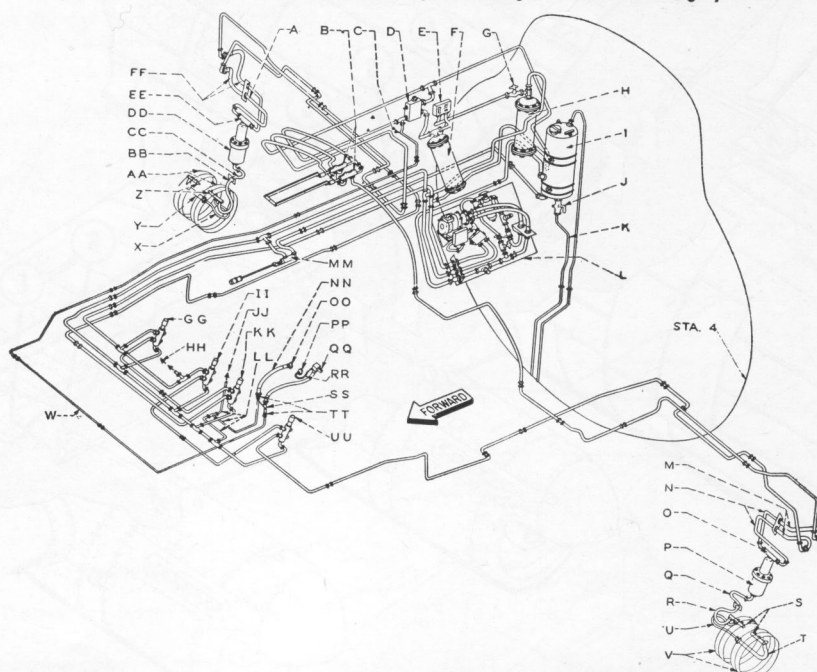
Hydraulic system installation: (A) copper tube $\frac{1}{2}$ in. OD \times .035; (B) emergency brake metering valves; (C) $\frac{3}{8}$ in. OD \times .035, 52SO; (D) relief valve; (E) selective check valve; (F) emergency accumulator; (G) manual shutoff valve; (H) accumulator; (I) supply tank; (J) drain cock; (K) $\frac{3}{8}$ in. OD \times .035, 52SO; (L) hydraulic panel; (M) hose assembly $\frac{1}{2}$ -in. tube; (N) copper tube $\frac{1}{2}$ in. OD \times .035; (O) shuttle valve; (P) return boost valve; (Q) copper tube $\frac{1}{2}$ in. OD \times .035; (R) hose assembly $\frac{1}{2}$ -in. tube; (S) inlet connection; (T) hose assembly $\frac{1}{2}$ -in. tube; (U) copper tube $\frac{1}{2}$ in. OD \times .035; (V) dual duplex brake expander tubes; (W) $\frac{3}{8}$ in. OD \times .035 52SO; (X) copper tube $\frac{1}{2}$ in. OD \times .035; (Y) hose assembly, $\frac{1}{2}$ -in. tube; (Z) inlet connection; (AA) dual duplex brake expander tubes; (BB) hose assembly $\frac{1}{2}$ -in. tube; (CC) copper tube $\frac{1}{2}$ in. OD \times .035; (DD) return boost valve; (EE) shuttle valve; (FF) hose assembly $\frac{1}{2}$ -in. tube; (GG) brake metering valve; (HH) to cowl flap valve; (II) brake metering valve; (JJ) to cowl flap valve; (KK) brake metering valve; (LL) $\frac{3}{8}$ in. OD \times .035 52SO; (MM) hand pump; (NN) hose assembly $\frac{1}{4}$ in. ID tube; (OO) main hydraulic-pressure valve; (PP) emergency hydraulic-pressure valve; (QQ) emergency pressure warning switch; (RR) $\frac{1}{4}$ in. OD \times .035 52SO; (SS) $\frac{1}{4}$ in. OD \times .032 or .035 SO; (TT) restriction fitting; (UU) brake metering valve.
